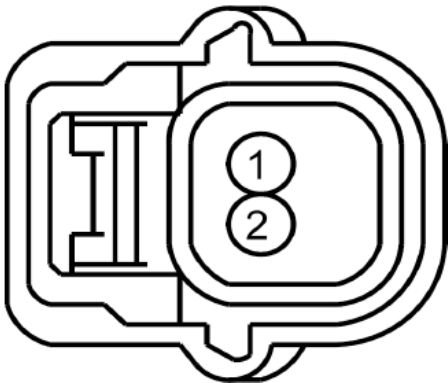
Passenger Side Air Curtain Module Connector End View (C3056)
